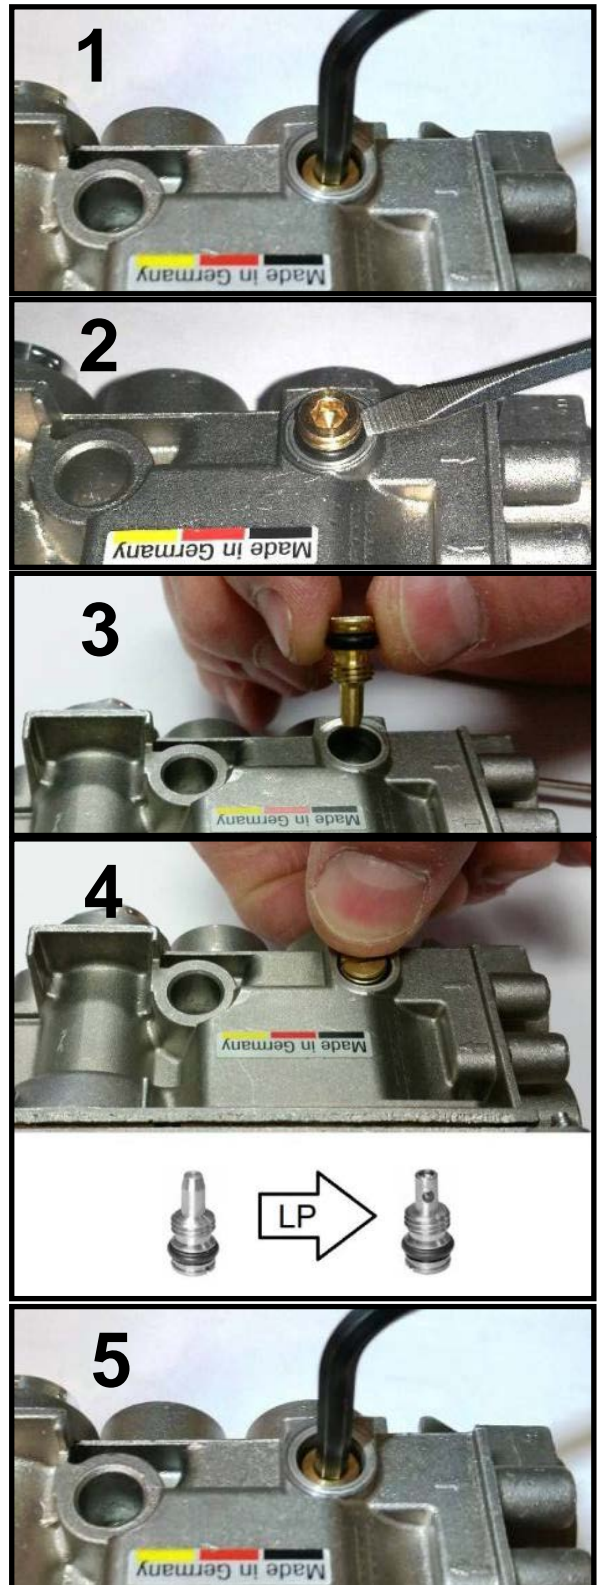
Low Pressure Orifice Access, Valve System Tilted Down.
